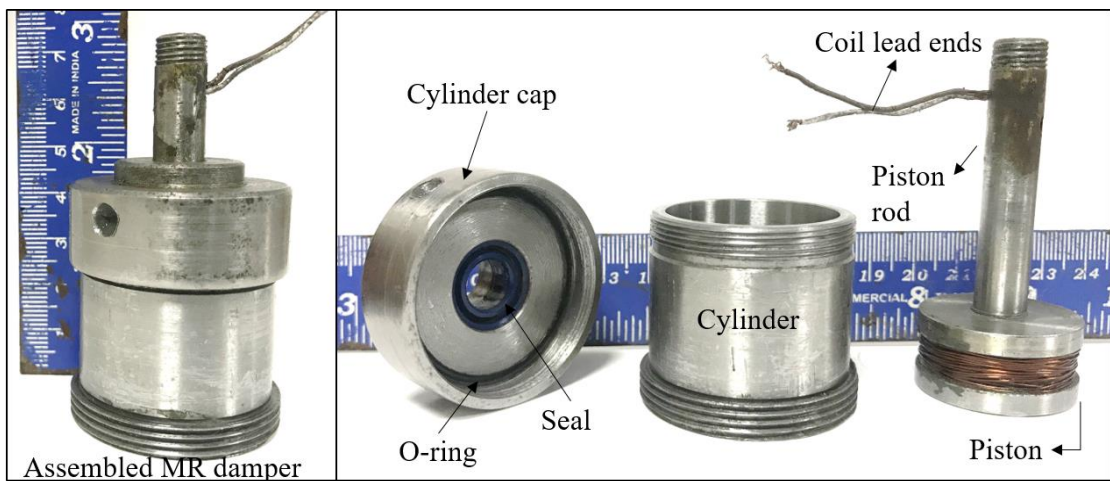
The damper fabricated to optimal design dimensions with its parts labelled
